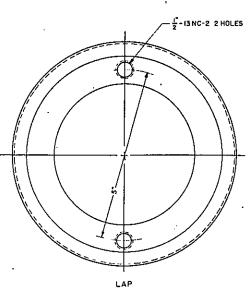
Scrapers for Valve Cover or Gasket Recess In Header.
